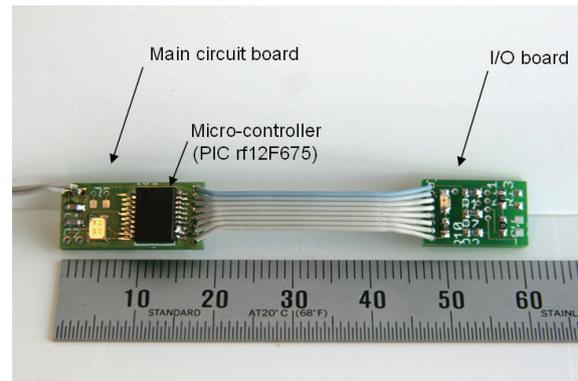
Photograph of fabricated microcontroller board and I/O board.
